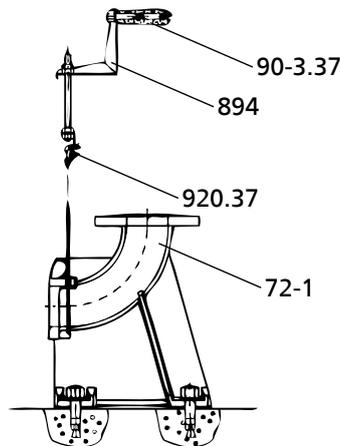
Mounting bracket variant for sizes with nominal discharge nozzle diameters DN 350, DN 400, DN 500, DN 600 and DN 700
